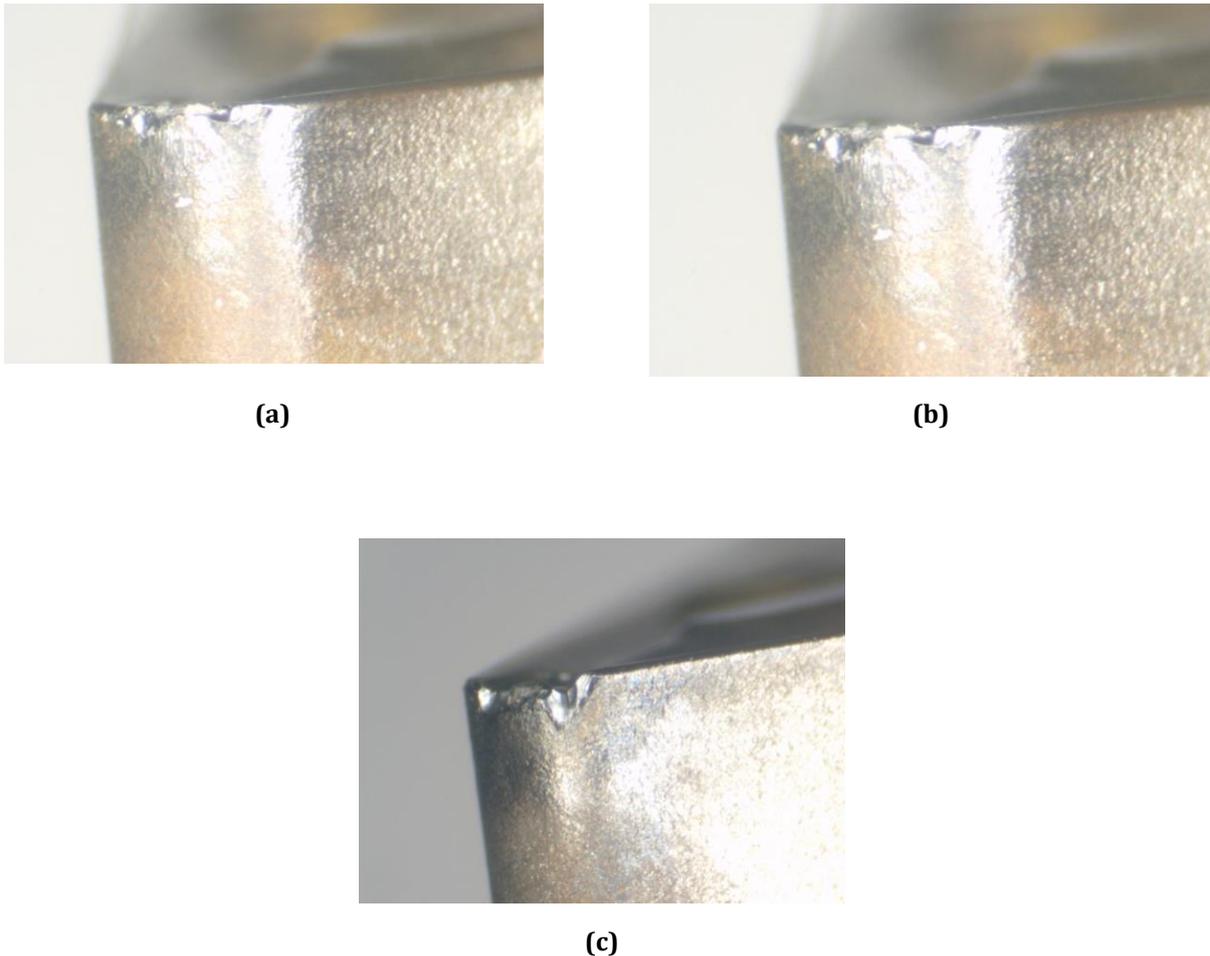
Tool Flank Wear at Cutting Tool (a) less than 0.1mm; (b) larger than 0.1mm; (c) chipping
